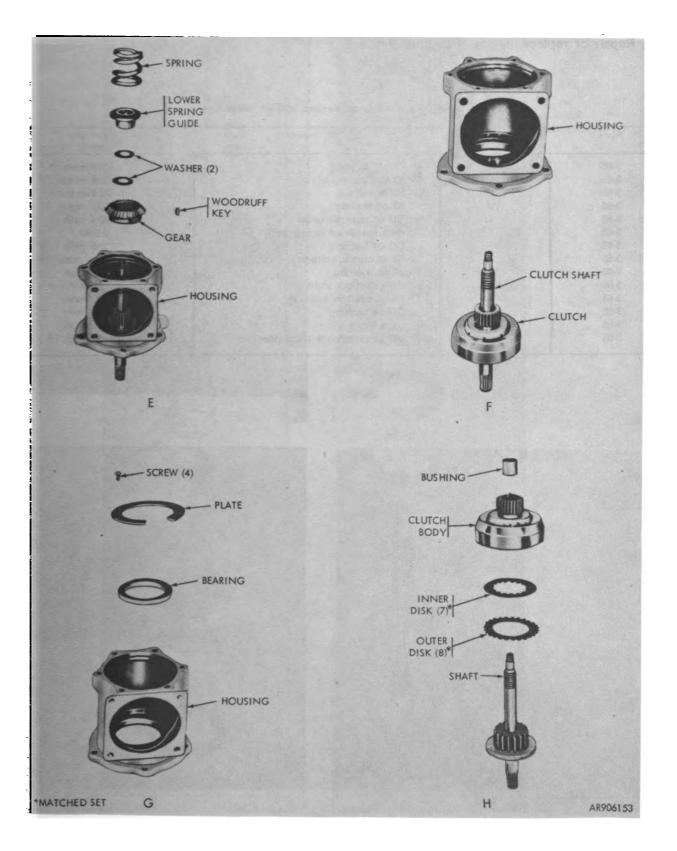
Traversing gearbox clutch disassembly and Digitized by Google
